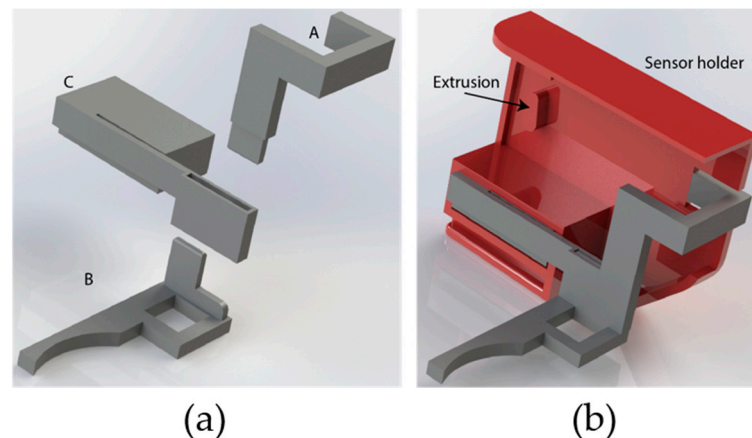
3D-printed components to provide “plug-and-play” deployment and operation within sanitizer dispensers: (a) compliant mechanism and (b) sensor module holder.
